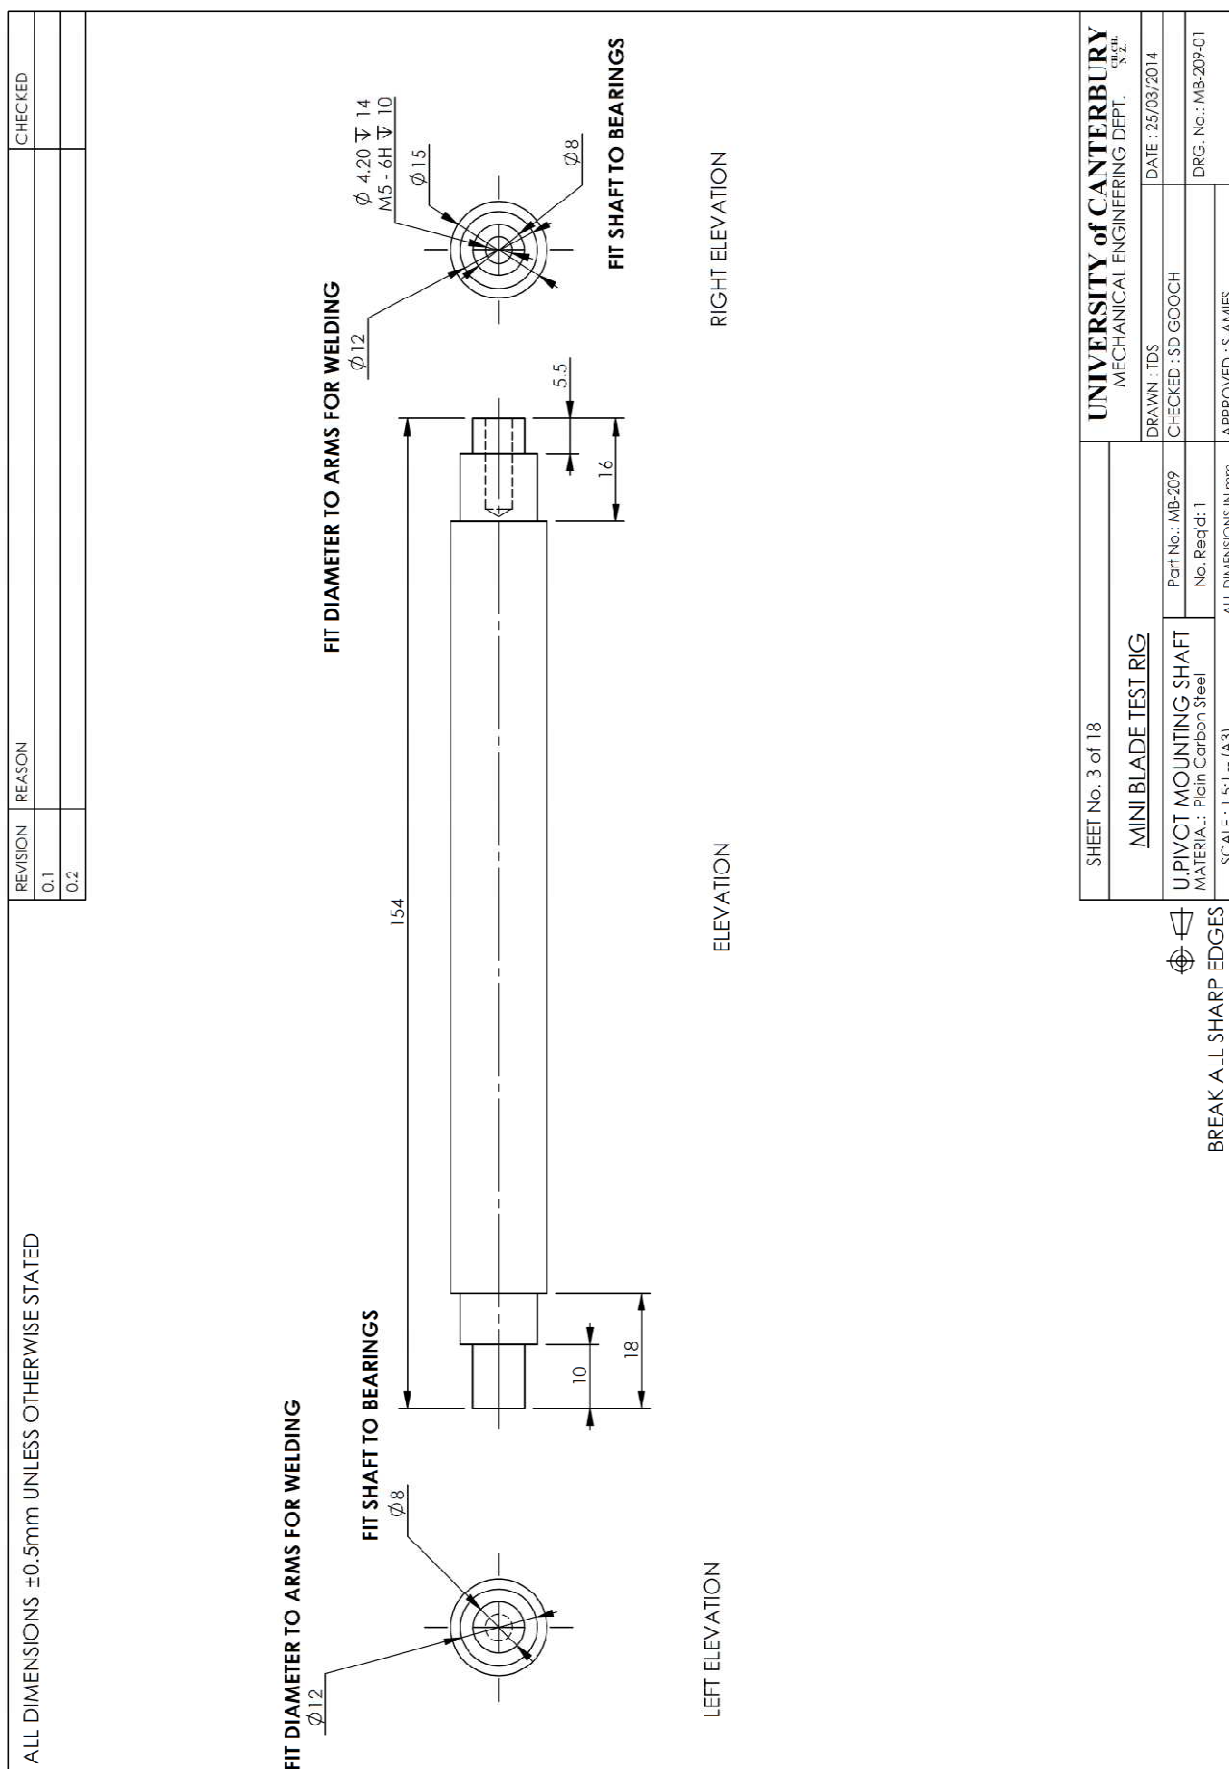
Manufacturing drawing for upper pivot mounting shaft in variable stroke test rig.
